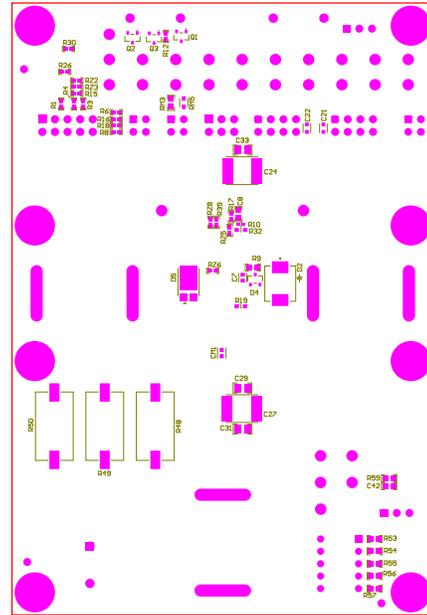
TPS25990EVM Board: Bottom Assembly
